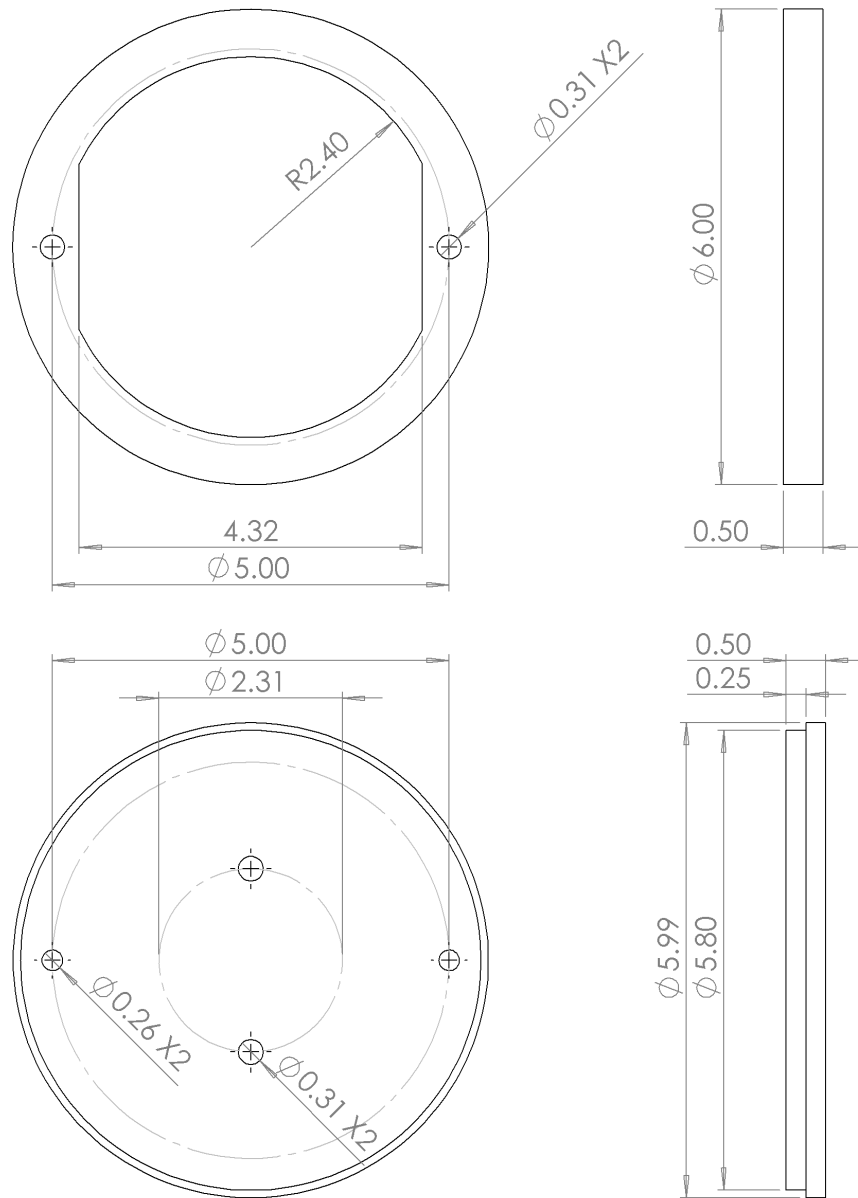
Nose Cone permanent ring bulkhead (top) and removable bulkhead (bottom) dimensions[in.]
